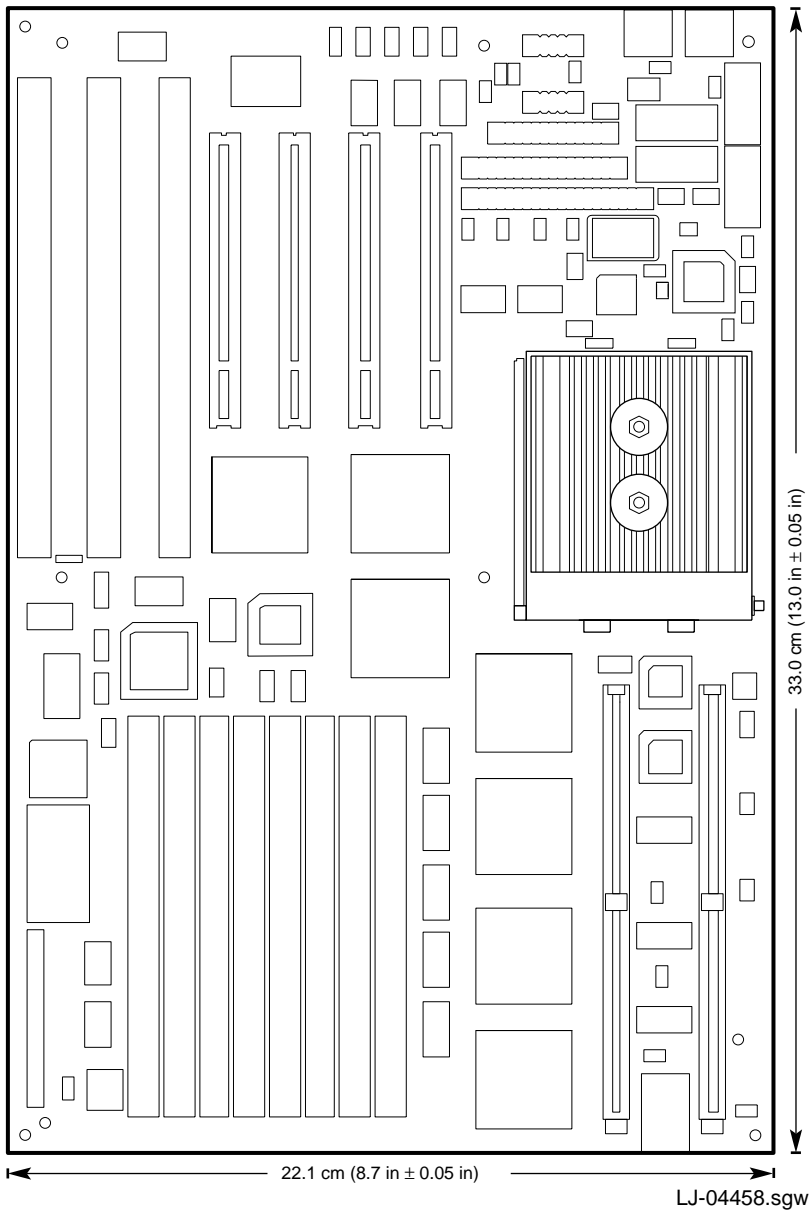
shows the Alpha PCI 64–275 board component layout and dimensions.
